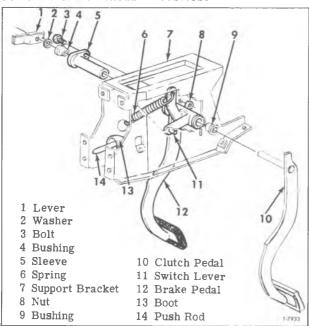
Clutch and Brake Pedal Installation (\$50 Models)
